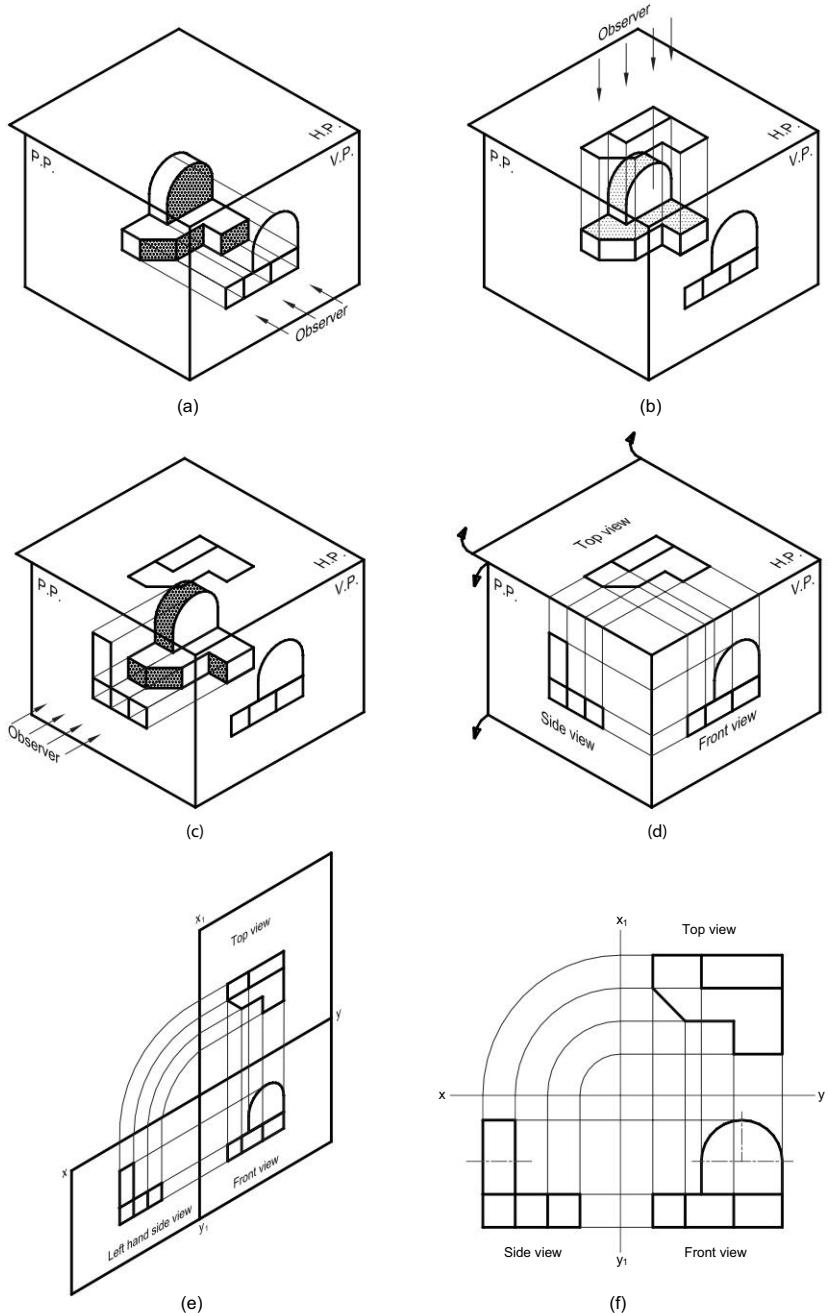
(a) Front view on V.P. (b) Top view on H.P. (c) Left-hand side view on P.P. (d) Co-relation among different views (e) Unfold the planes (f) Final representation of front, top and side views
